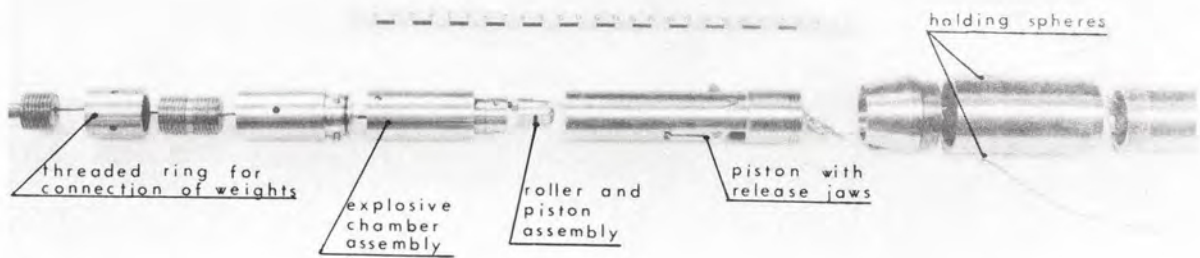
Exploded View of Piston Assembly of Full Scale Prototype
